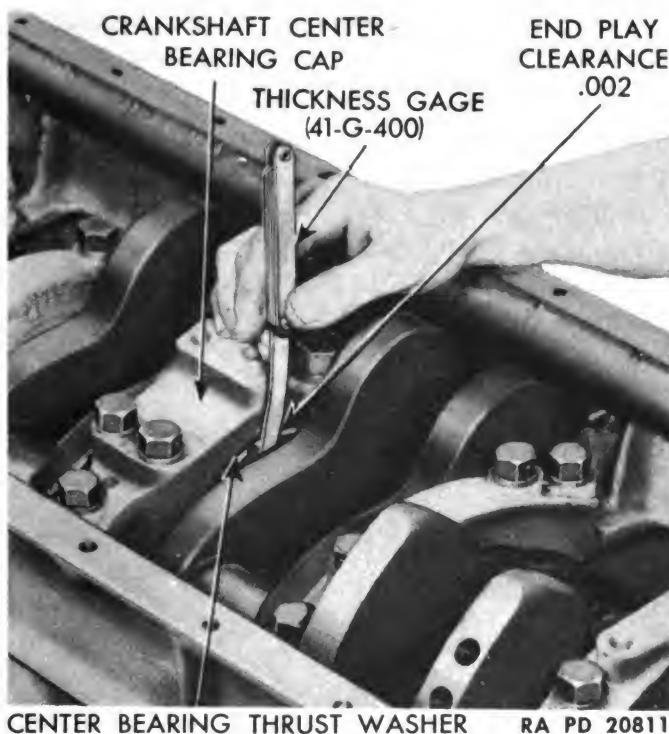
Measuring Clearance at Center Main Bearing Thrust Washer with Thickness Gage
